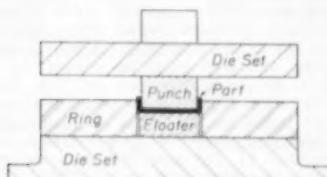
Die for Tables I and II, 3-In. and 12-In. Parts
